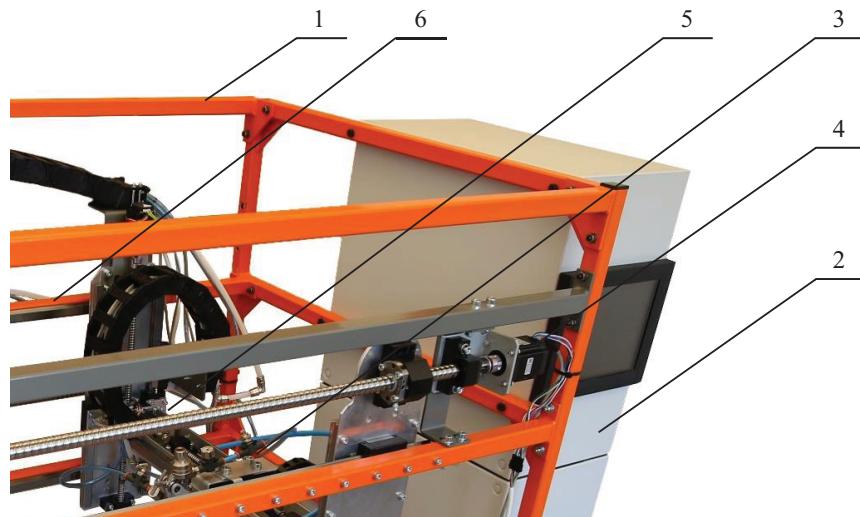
View of drive axle: 1 – frame, 2 – steering box, 3 – traverse with spraying system, 4 – stepper motor, 5 – ball screw drive, 6 – guide.
